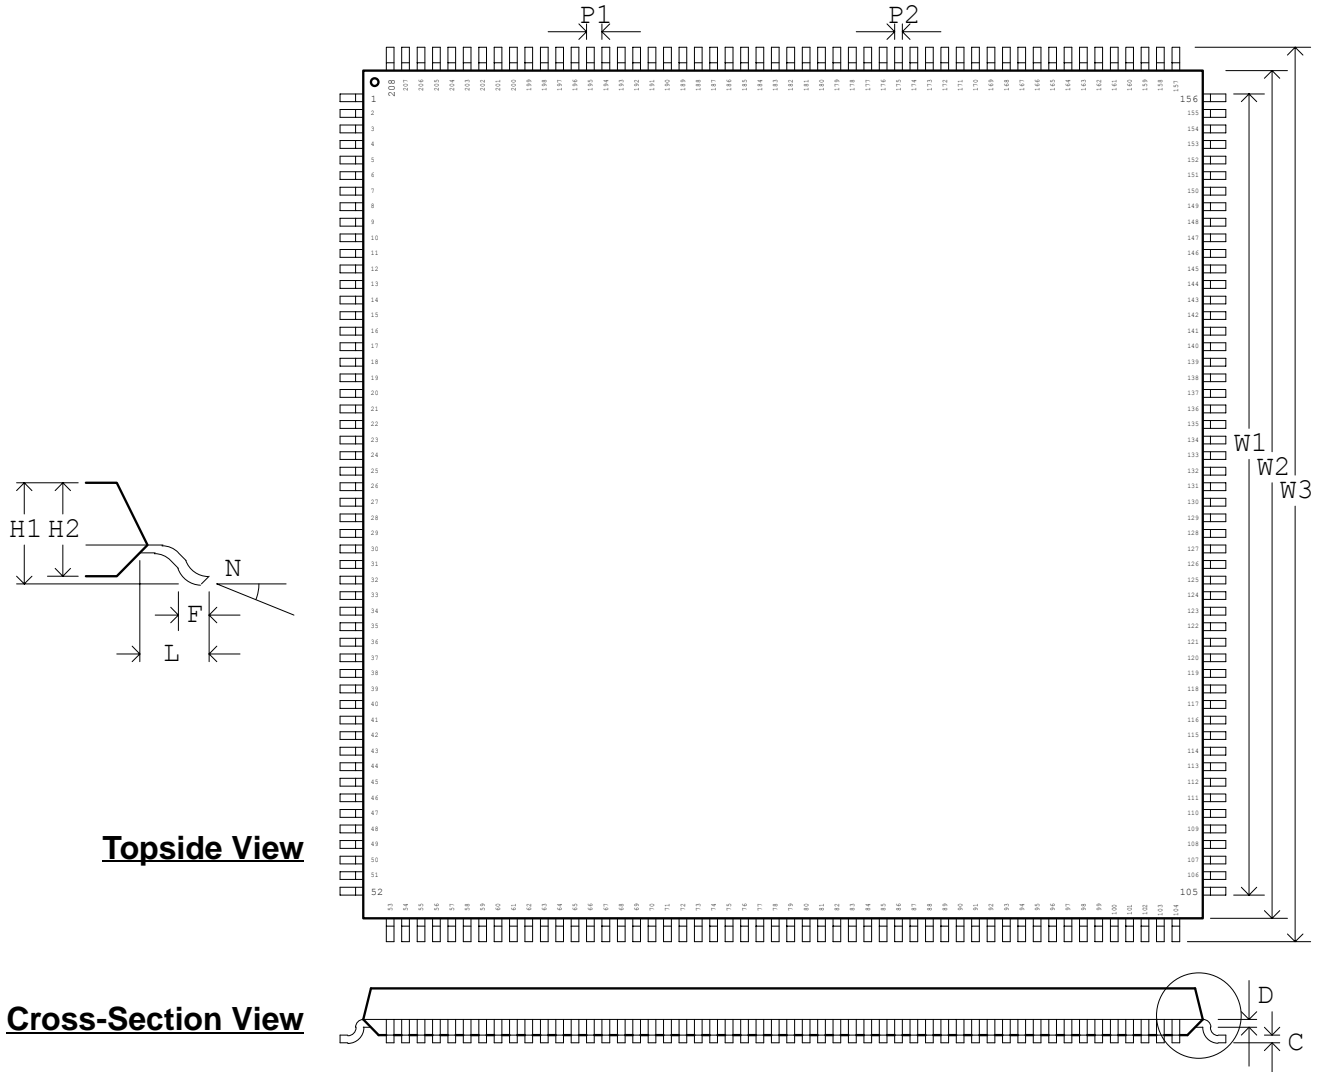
PCI 6156 208-Pin PQFP Mechanical Dimensions
